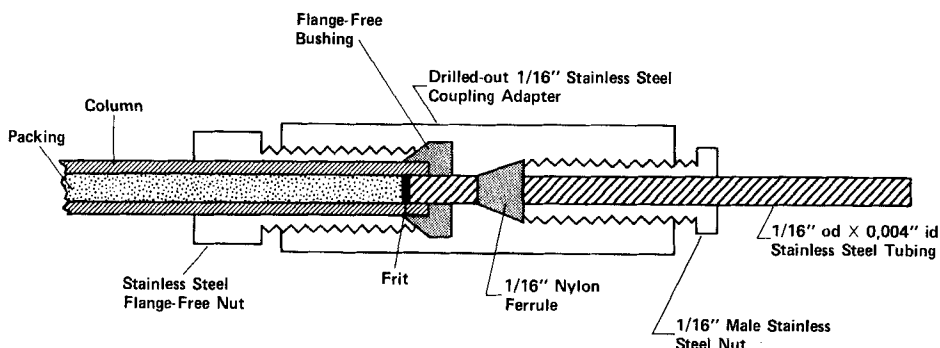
Schematic of Column End Fitting Design Utilizing Flange-Free Bushings
